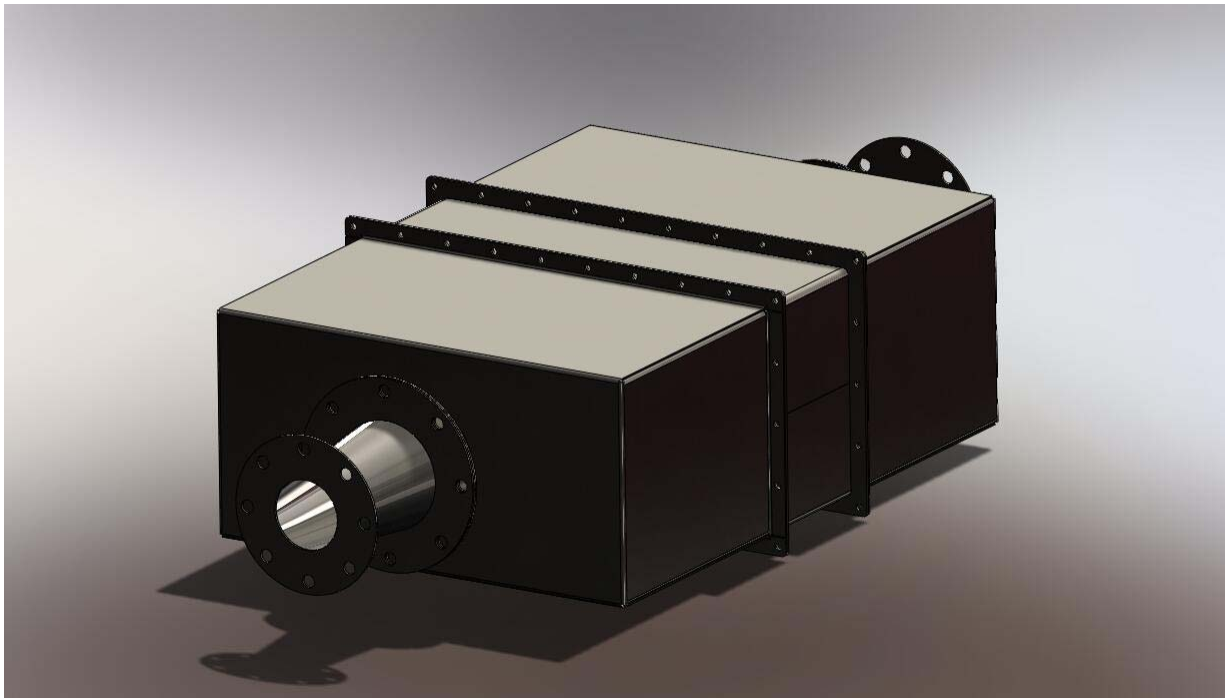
One of the combined DPF and SCR catalyst assemblies for the generator engines
